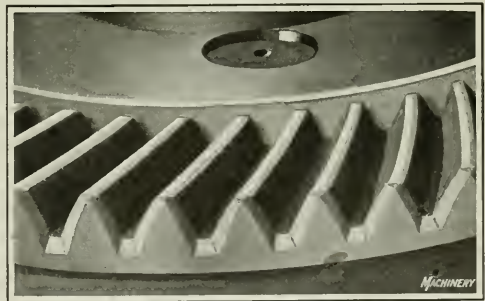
Section of a Ring Bevel Gear showing Teeth which have been chamfered
